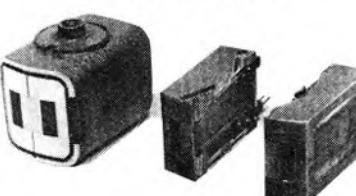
Studio playback head with two equal halves clamped together (the wound halves of the core are already moulded with the mounting)
